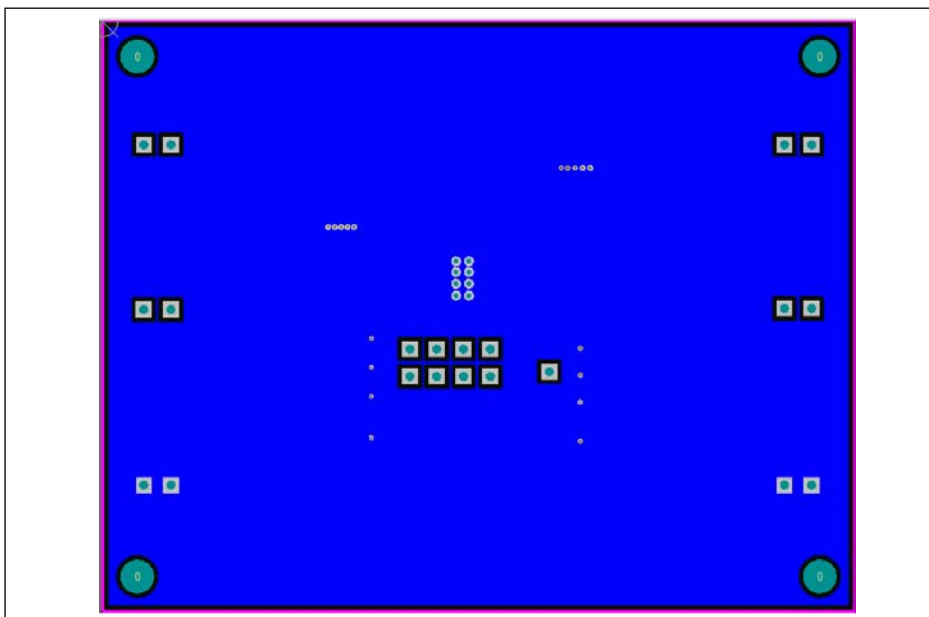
Board PCB Layout - Bottom Layer (SOP-8-EP)
